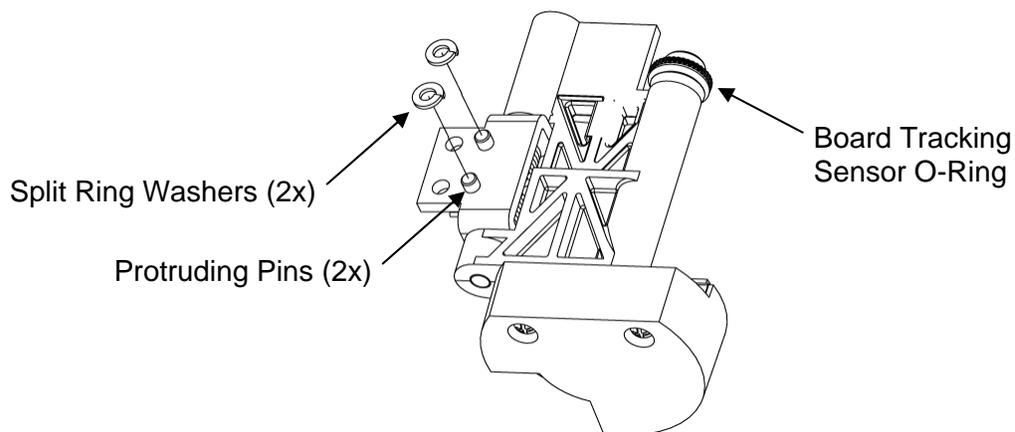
REPLACING THE O-RING AND ADDING SPACERS TO THE BOARD TRACKING SENSOR
